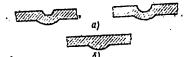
Types of protrusions (projections); a - conventional type employed in projection welding; b - without holes on the reverse side.
